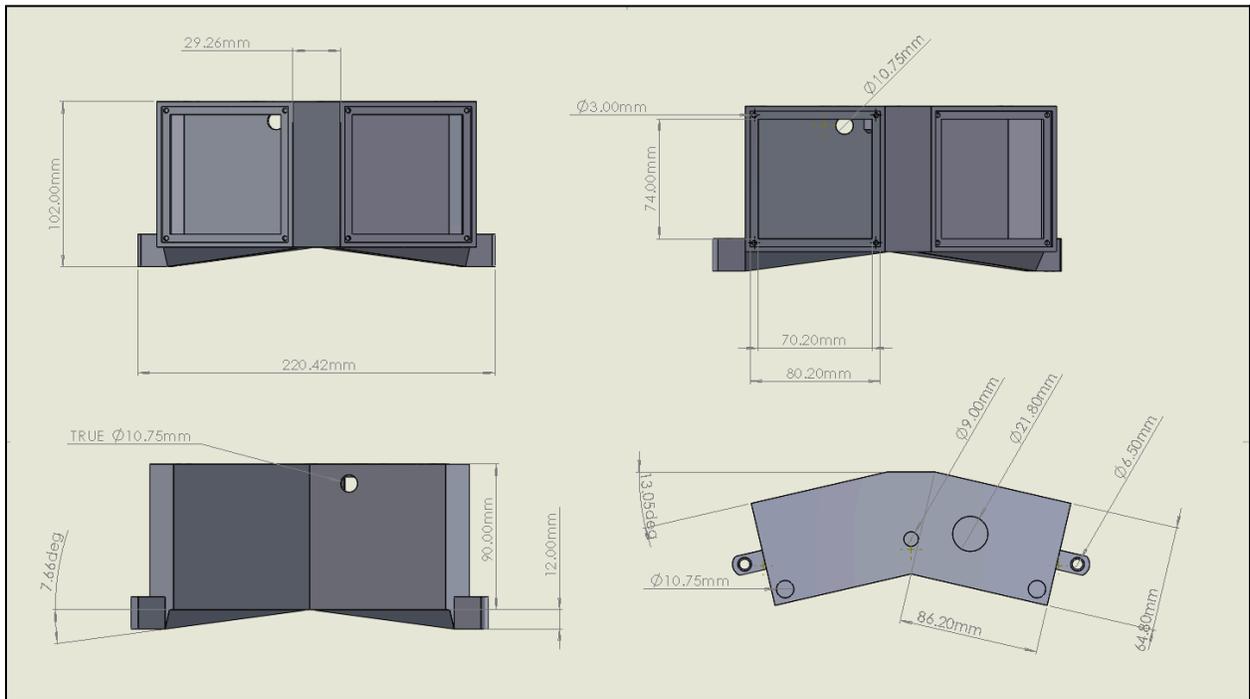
Power and Sensor Circuitry housing CAD and dimensions.
